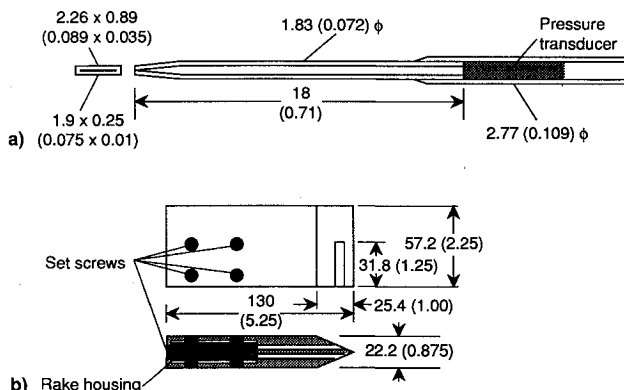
Schematic of a) pitot probe and b) boundary-layer rake assembly [all dimensions in mm (in.)].
